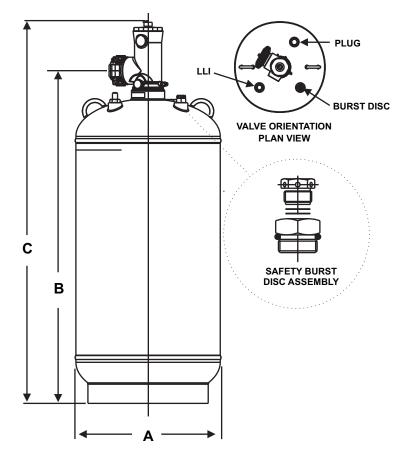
600 to 900 lb. Cylinder with 3 in. Valve
